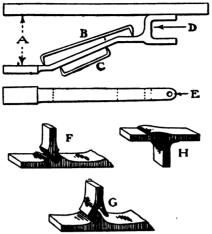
ADJUSTING ECCENTRIC BOD AND FORGUING THE JAW OF A ECCENTRIC.
